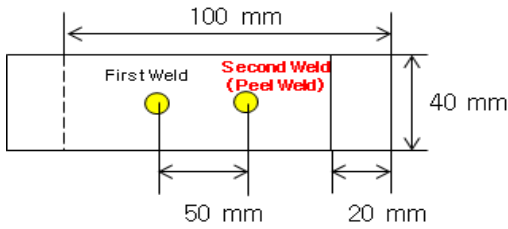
Schematic drawings of a two sheet of tensile peel test sample geometries.
